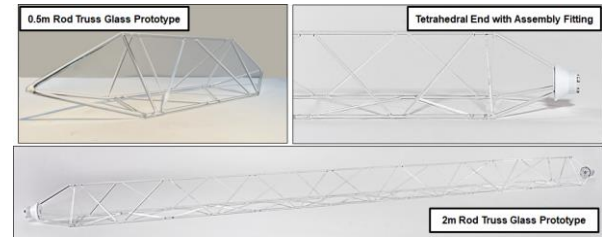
Photographs of the prototype welded glass trusses, built in borosilicate.
